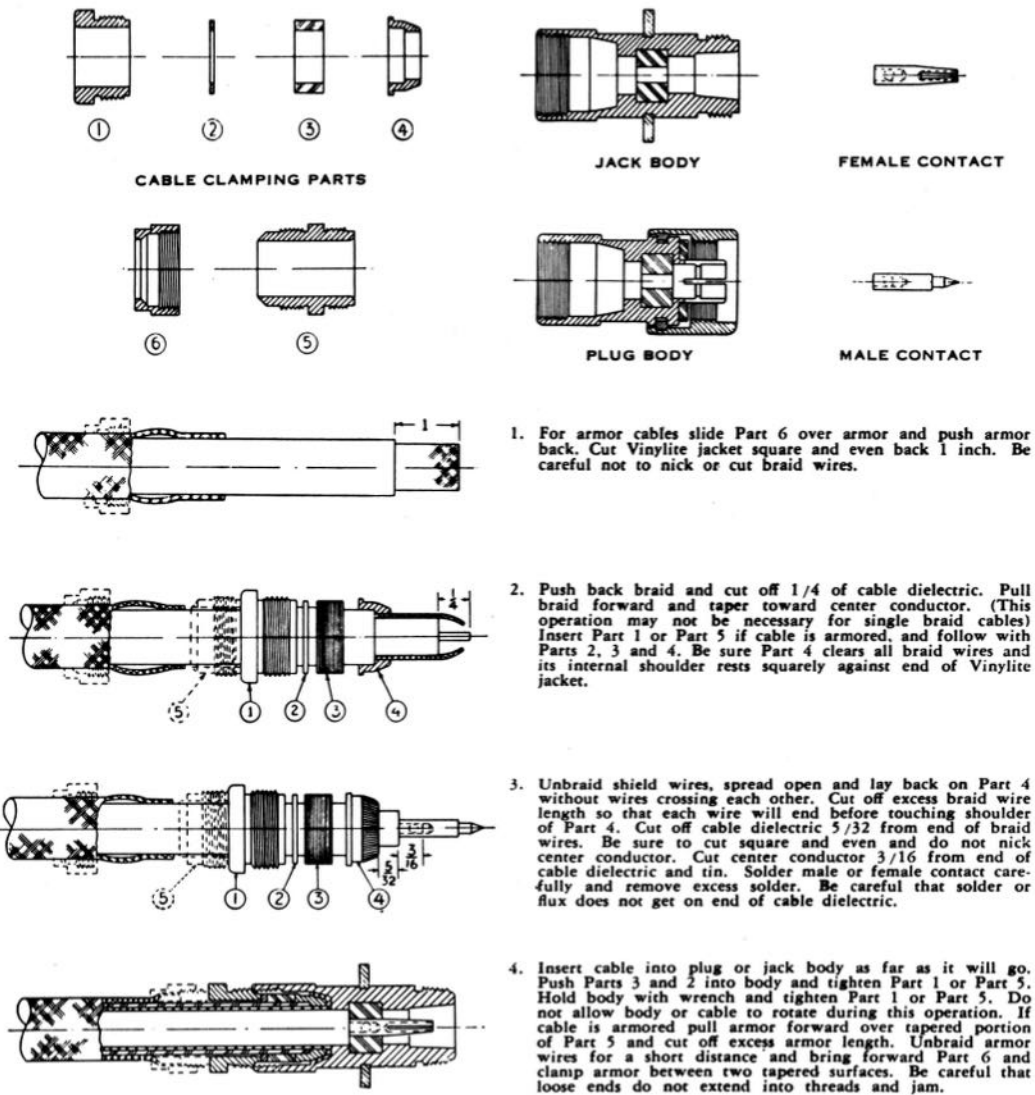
Method of Assembling Plug P404 (AN Type UG-21B/U) to AN Type RG-11/U Coaxial Transmission Line to Form ANTenna Input Cable
